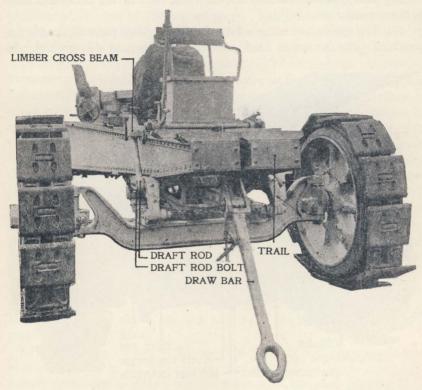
155-mm. Gun Carriage Limber, with Trails Attached.
